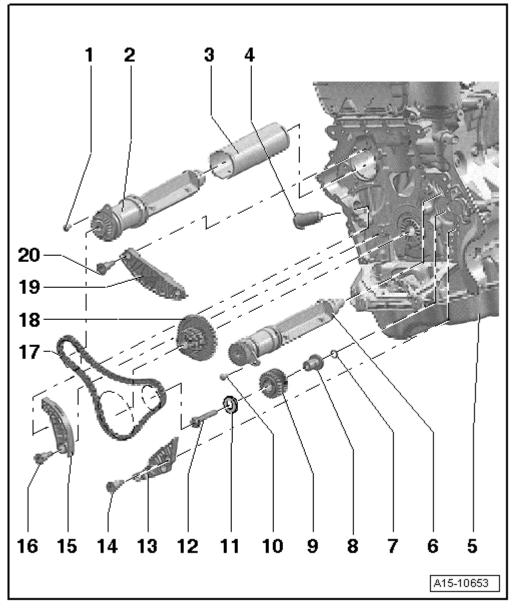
Identifying Assembly Overview: Balance Shaft Timing Chain Courtesy of VOLKSWAGEN UNITED STATES, INC.
